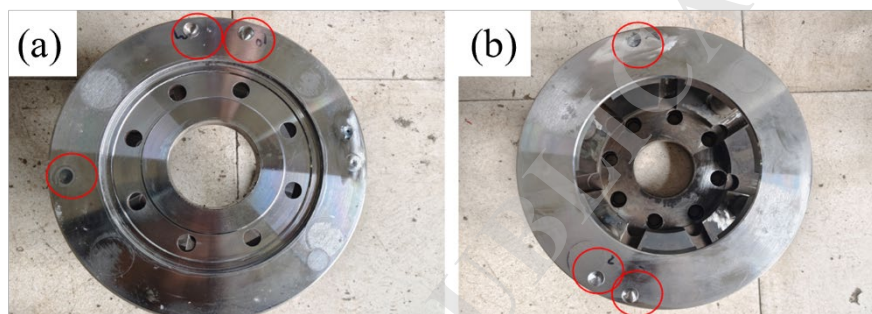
(a) Evaluate the primary disc of the impeller body following dynamic balancing; (b) Examine the auxiliary disc of the impeller body post-dynamic balancing.
